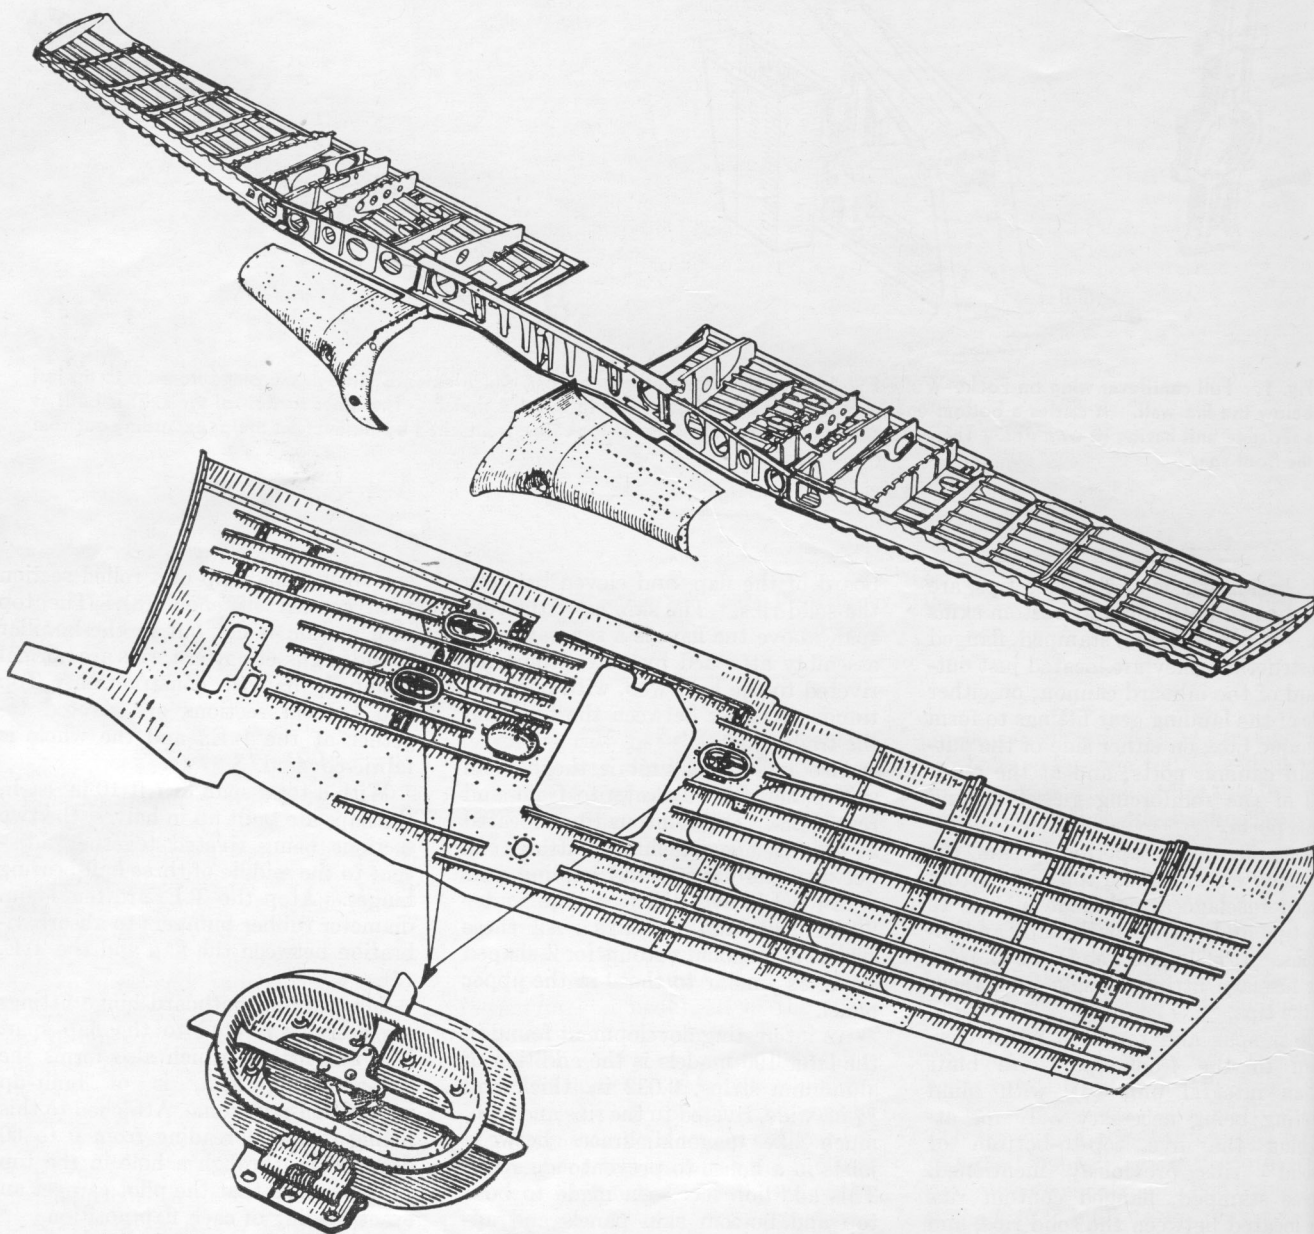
Front spar at center line is $16\frac{3}{4}$ in. deep, with triple-web construction extending out beyond the inboard gun ports and double-web to a point beyond the outboard gun ports, from which point it is conventional single-web I beam. The lower skin, with ribs, stringers, and inspection panels, is made up as a separate subassembly and attached as a unit to the spar. A joggle in the spar is deep enough so that the landing gear wheel is in front of it when retracted.
